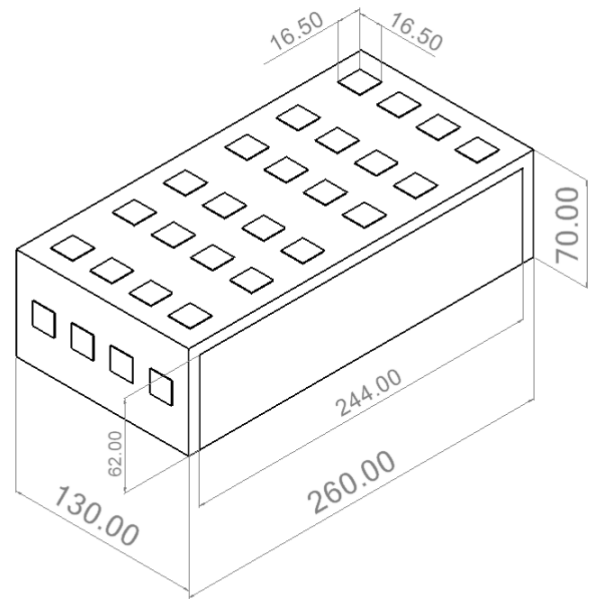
THE DIMENSION OF A 3D HEAT SINK
